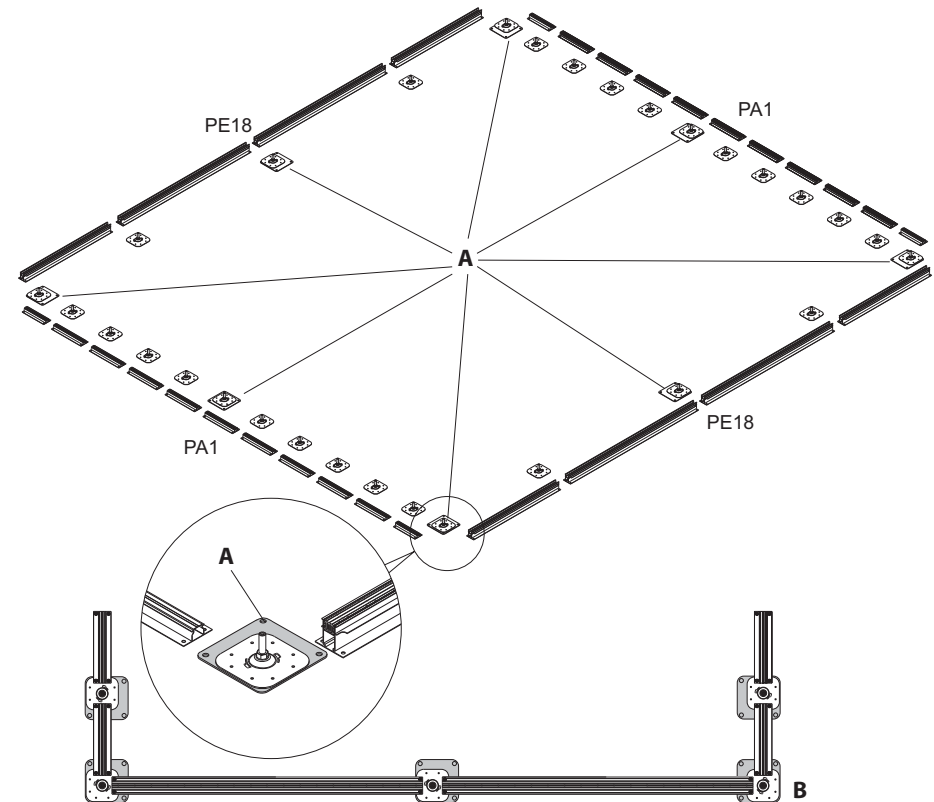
LAYOUT OF PERIMETER COMPONENTS (ground anchorage kit)
